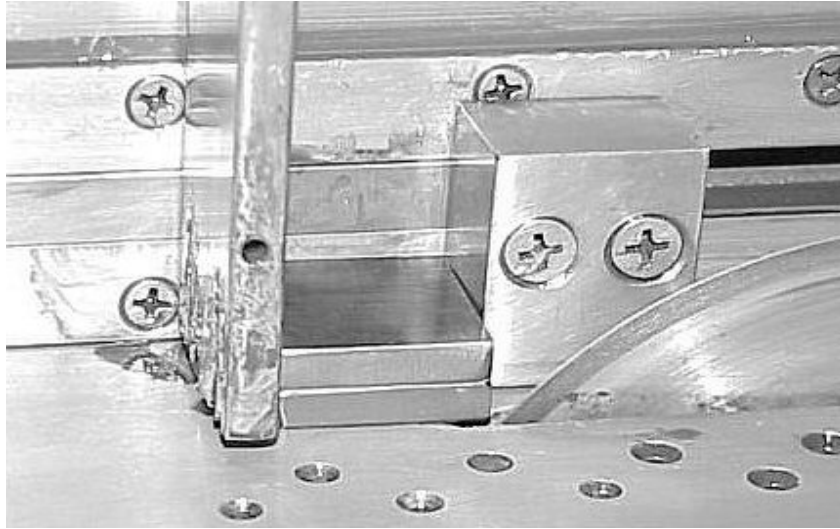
Dicing of 28 X 28 mm composite pieces to produce 6 X 12 mm test pieces. Dicing performed on modified diamond wafering saw with controlled feed to minimize stresses during sectioning..
